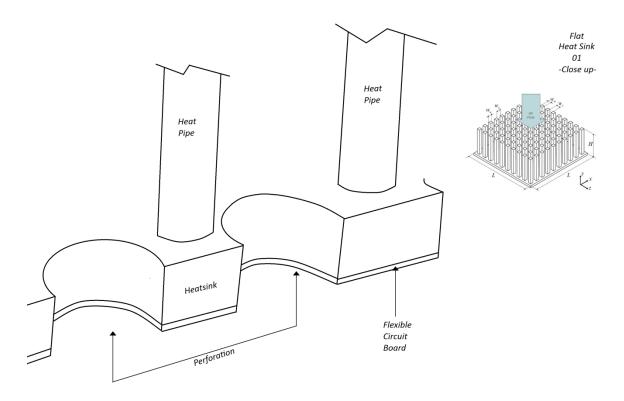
Micro and Macro view of the heatsink in Design 2
